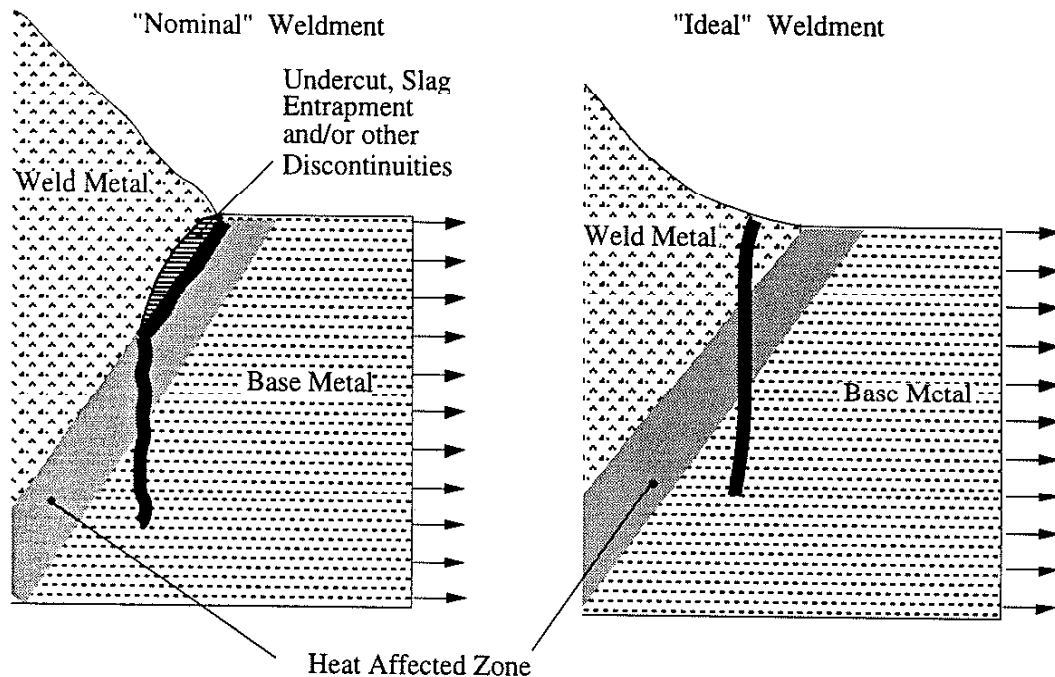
Conceptual drawing of fatigue crack initiation and growth at the toe of (left) a "Nominal" weldment having a substantial (≈ 0.1 in. depth) weld discontinuity (slag entrapment) at the root of the critical notch (weld toe) and (right) an "Ideal" weldment with good wetting and no substantial discontinuity at the root of the critical notch.
